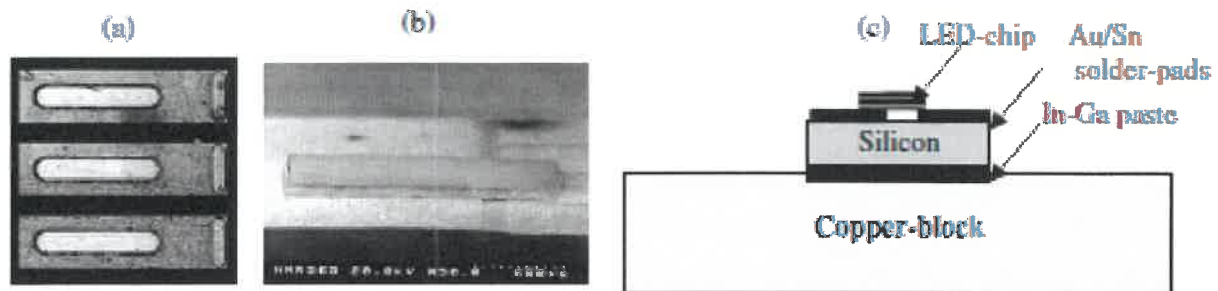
a) Photograph of three LED-chips, showing the layout of the p-and n-contact pads, b) flip-chip assembly, showing an LED-chip, mounted across two solder pads, and c) schematic view of a flip-chip assembly (side view).
